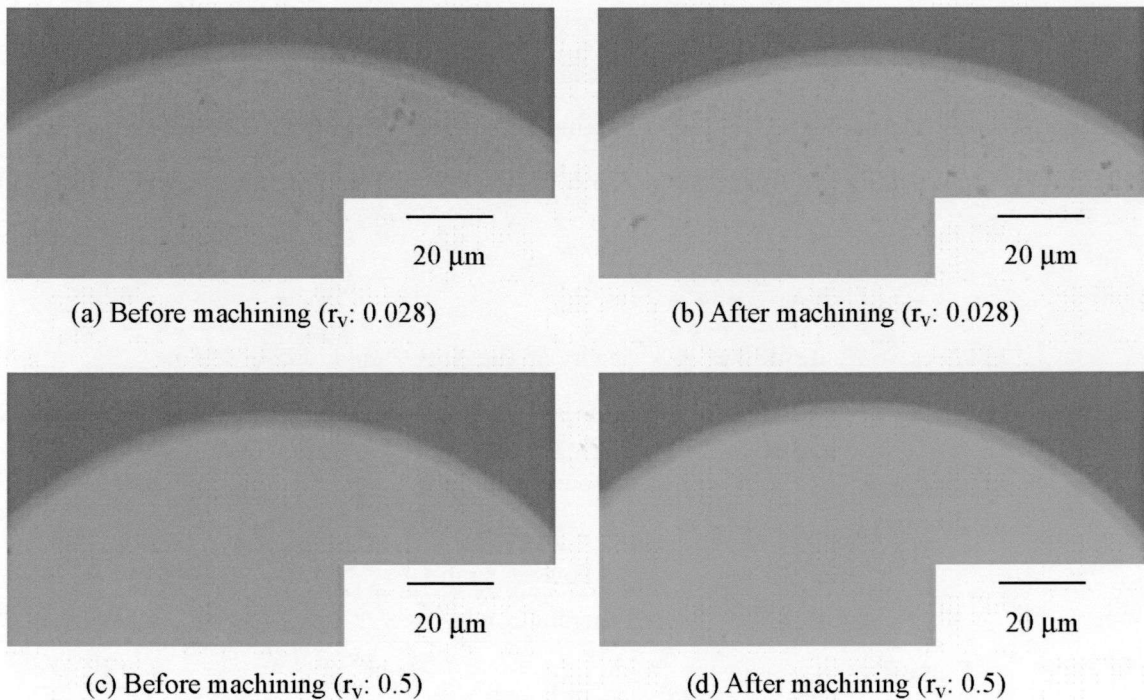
Tool used in the machining of Tungsten Carbide
